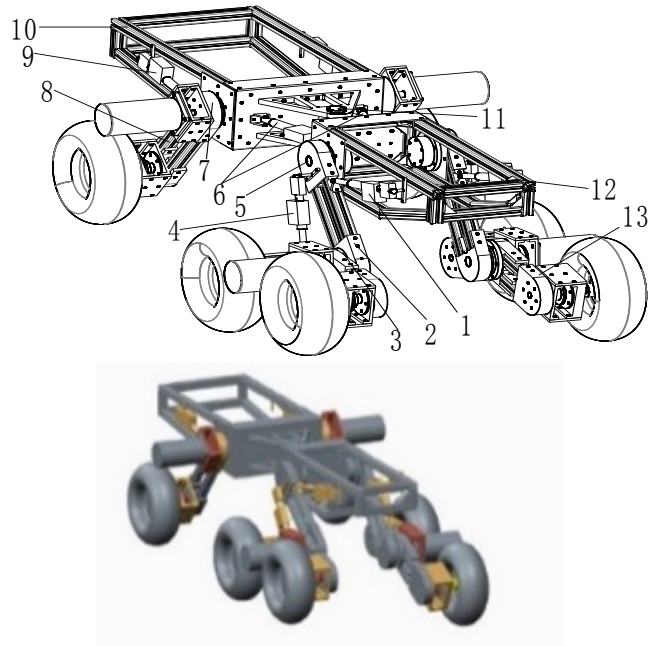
Six-wheeled luffing articulated chassis and virtual prototype: 1. electric putter 1; 2. right-front wheel leg; 3. hinge point of the “V”-shaped structure; 4. electric putter 2; 5. chassis body hinge point of the right-front wheel legs; 6. articulated steering electric putter 3; 7. chassis body hinge point of right rear wheel legs; 8. right rear wheel legs; 9. electric putter 4; 10. rear frame; 11. articulated steering hinge point; 12. front frame; and 13. “V”-shaped wheel leg.
